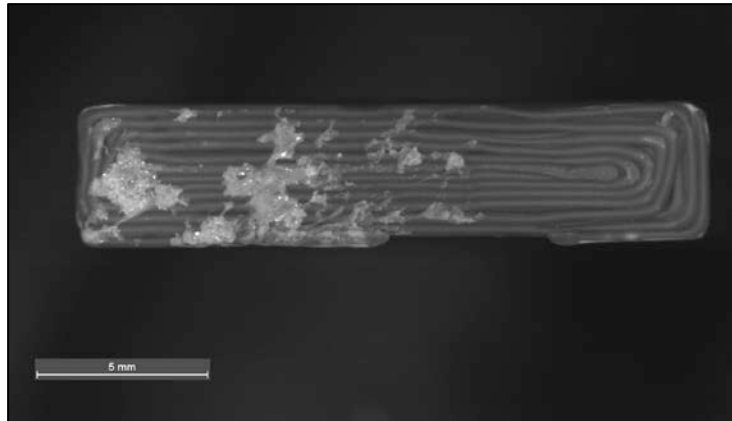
INITIAL LAYER OF UPRIGHT SPECIMEN AFTER BRIM REMOVED
